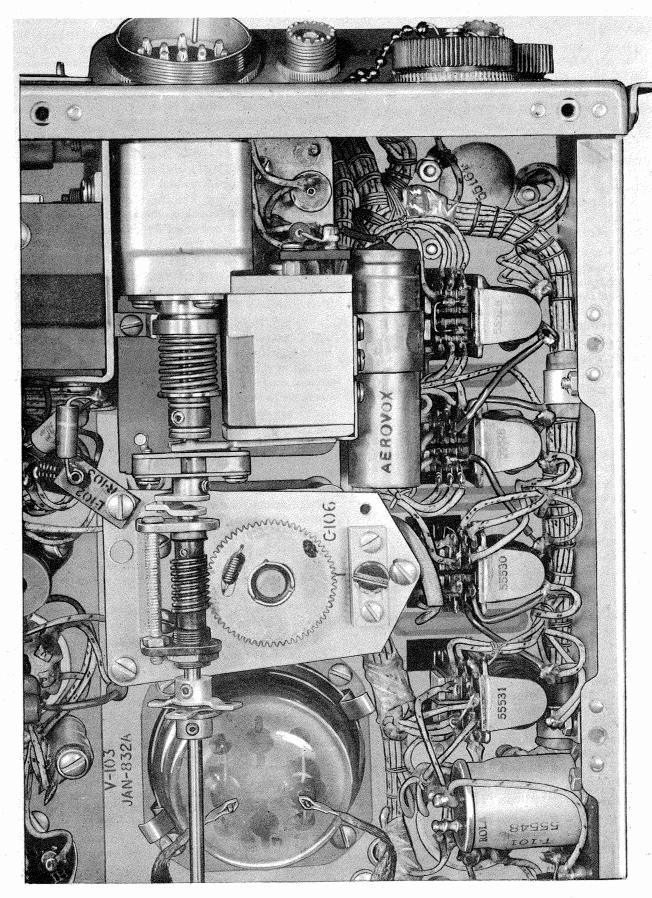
, Radio Transmitter T-67/ARC-3 or T-312/ARC-36. Without Modification M-3—Clutch-Brake Mechanism with Worm Gear Housing in Place
